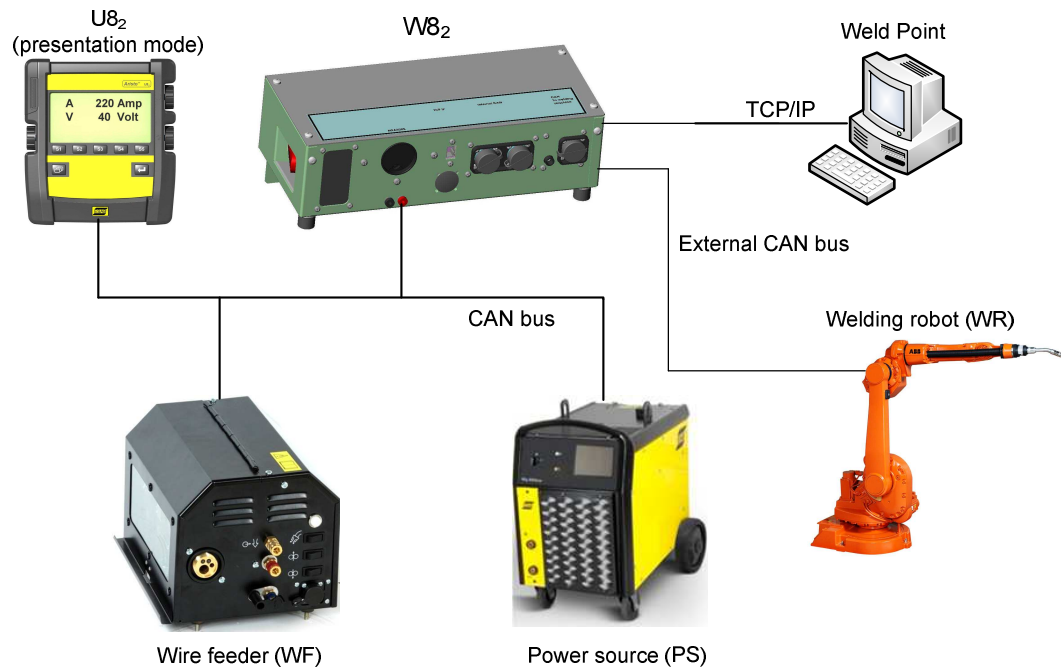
System overview of the customer's welding system for mechanized welding (using a welding robot).
